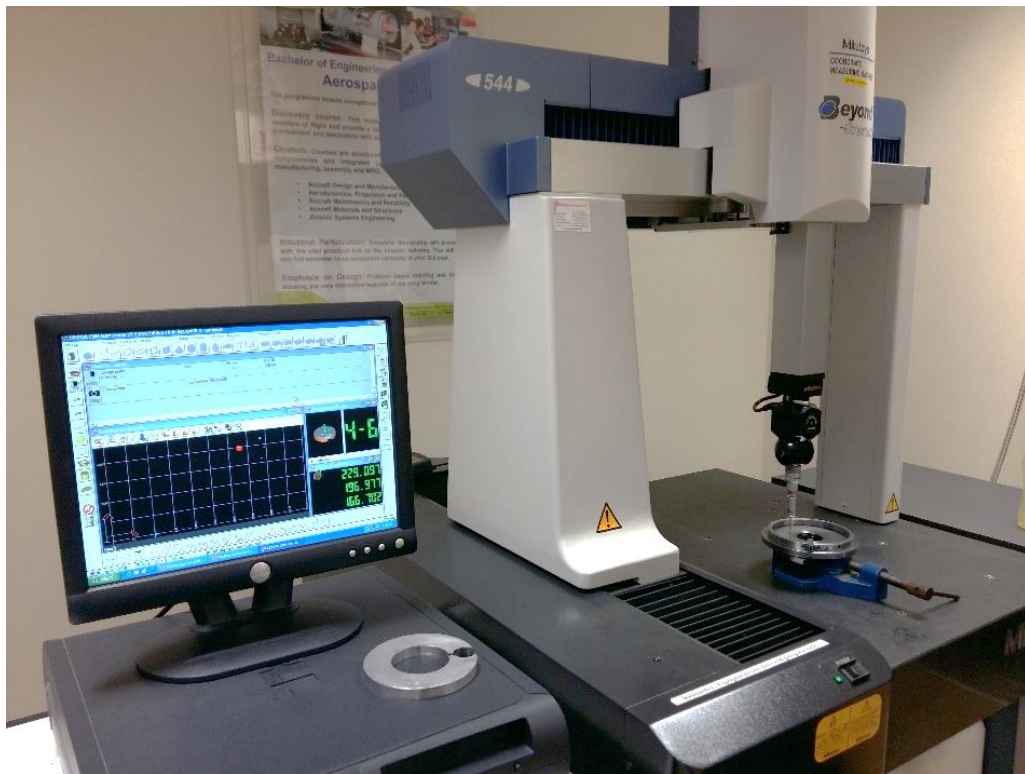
Coordinate measuring machine used to inspect compressor build quality
